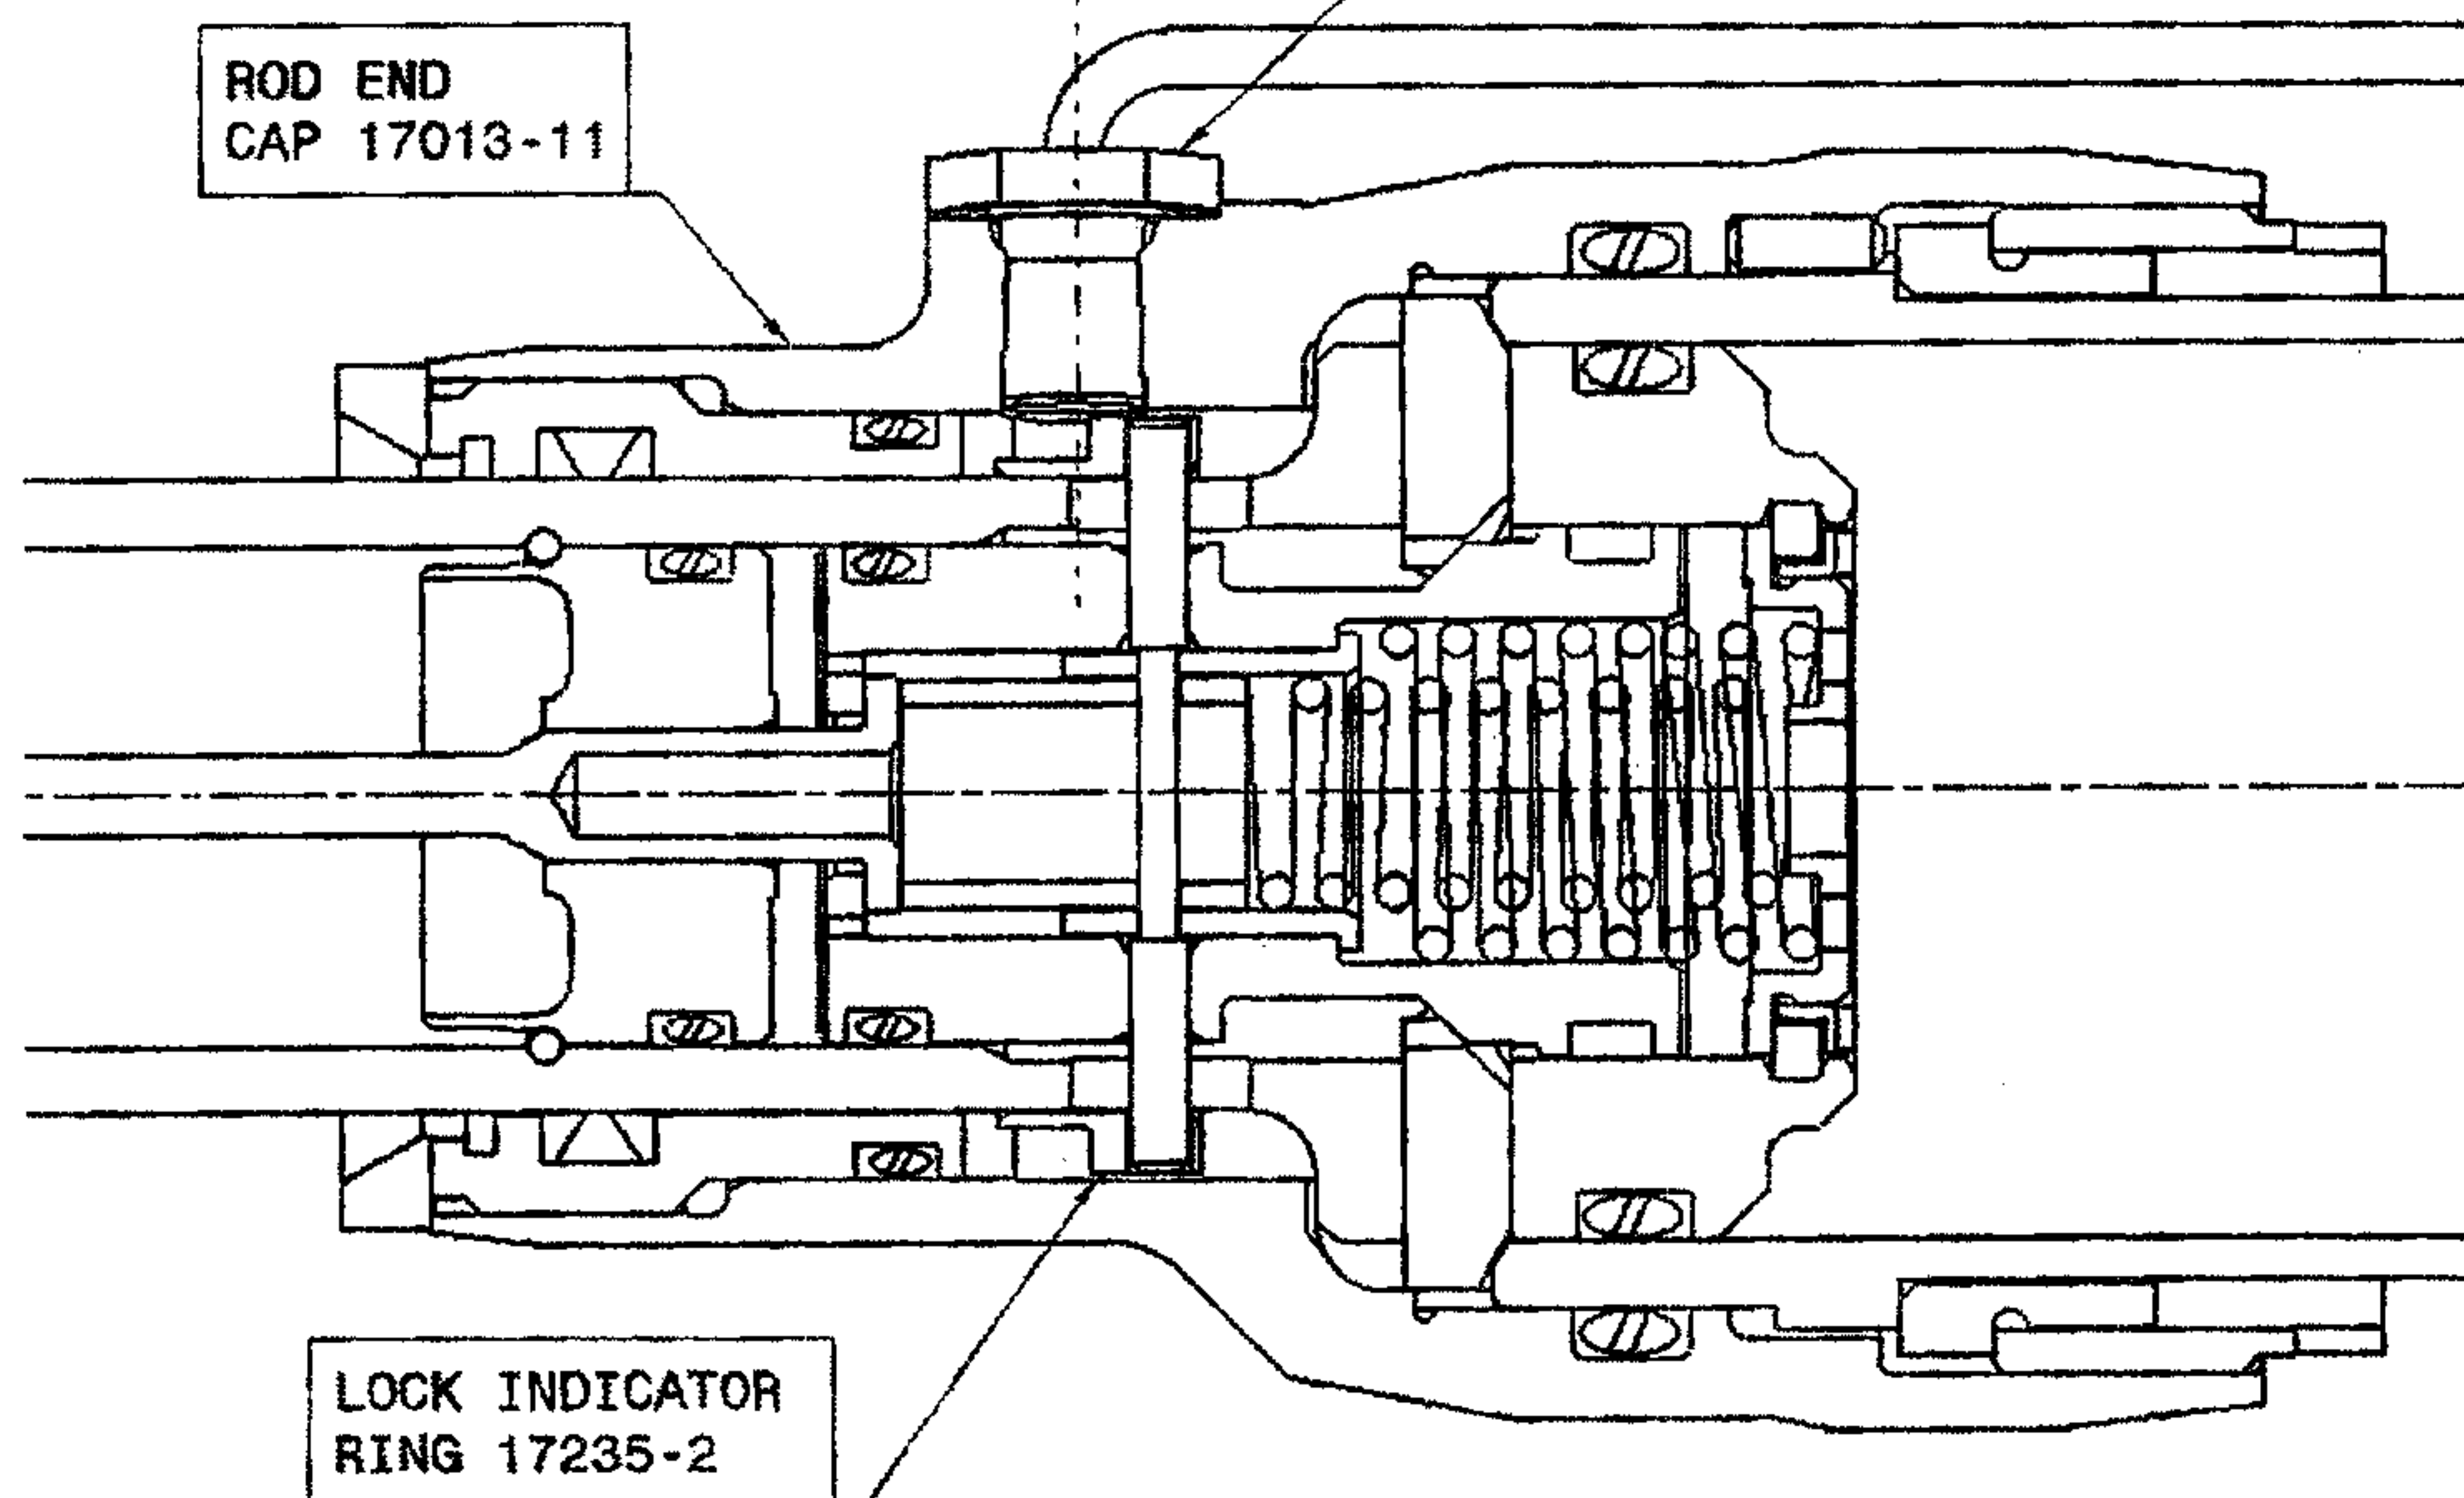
Figure B: Actuator Side Brace in the Fully Extended Locked Position
